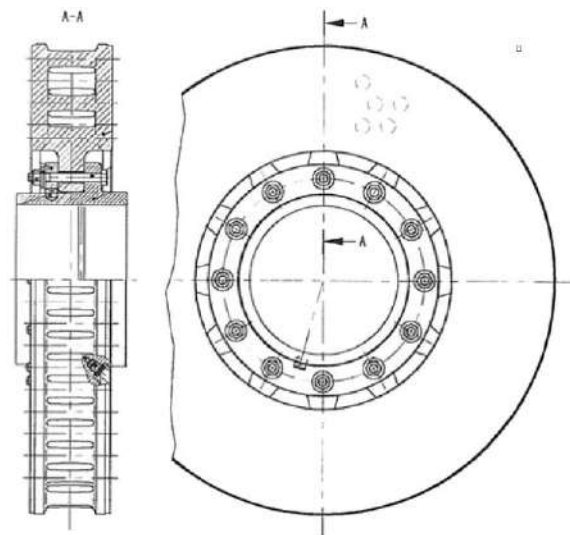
Claw mechanism of springless parking brake 780.00.00.000-06:
